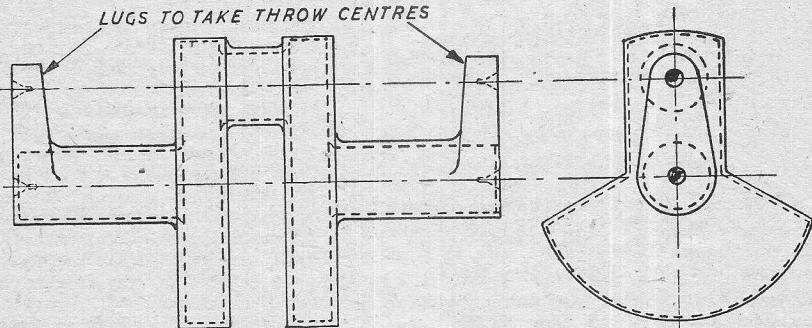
A forged crankshaft equipped with lugs at each end to take centres for turning the crankpin
